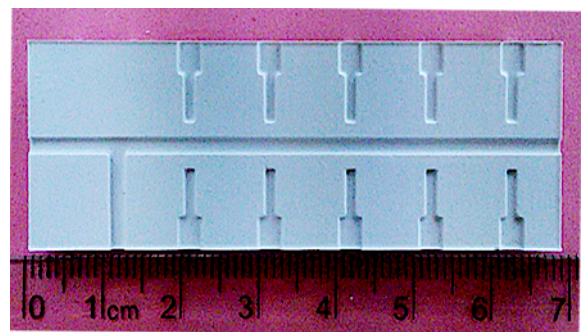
Structured green body manufactured via injection moulding using a 3D printed mould insert made of Digital-ABS.
